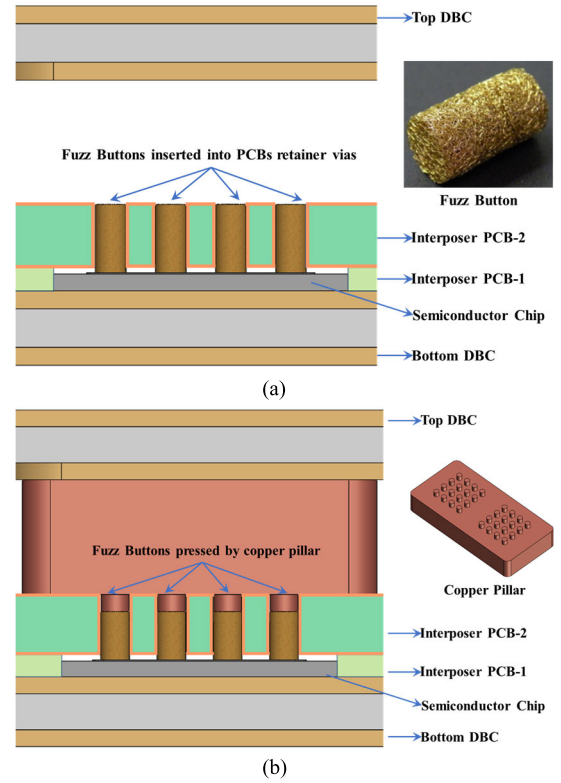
Use of fuzz button to establish pressure contact from the topside of the die. (a) Fuzz button inserted in retainer PCB. (b) Fuzz button pressed and secured using copper pillar.
